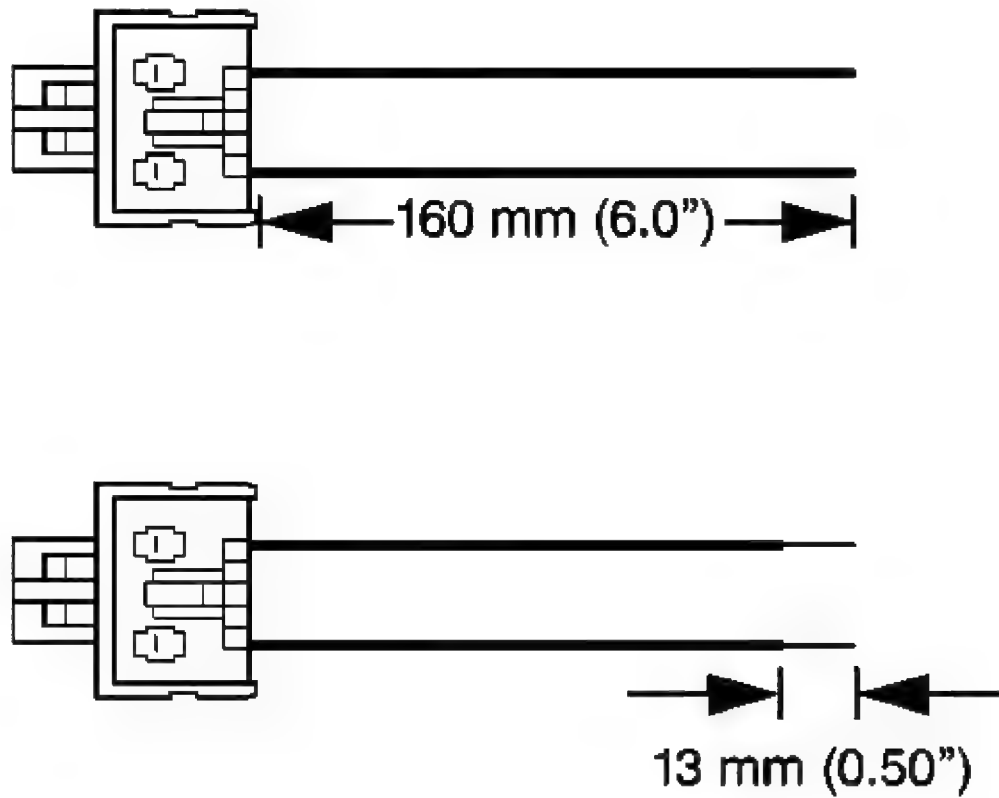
Identifying Proper Stripping Of Connection Wire Leads
